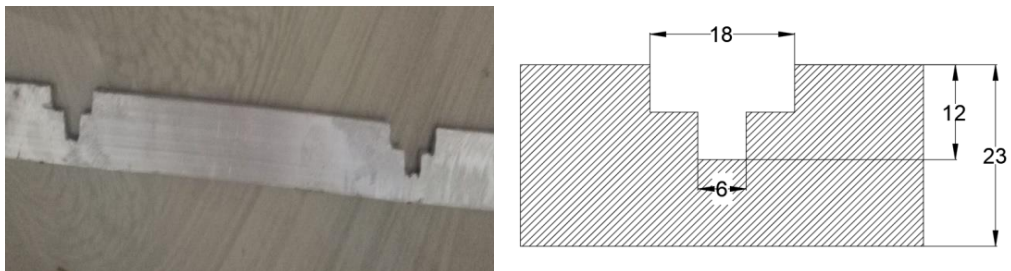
Photographic view and geometrical view of plain tape step cut rectangle
